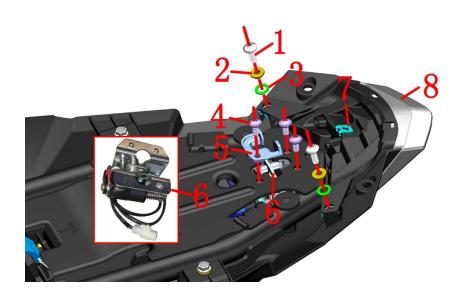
REAR COVER COMPONENT		Rear turning light parts for after sales service	CHK
